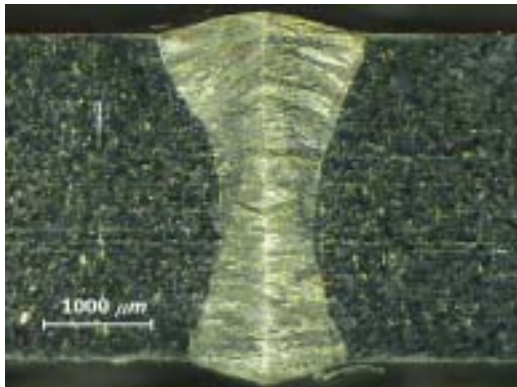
Cross-sectional area of bead on plate welding at $P=1.7kW$, $v=1.0m/min$ and $z=0.5mm$
